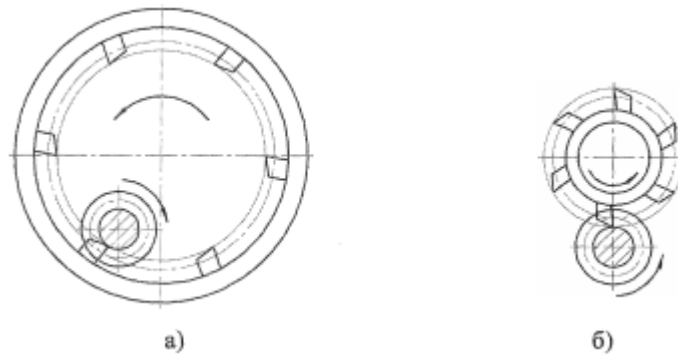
Schemes for cutting coils by the "vortex" method; a - with internal touch; b - with external touch.
